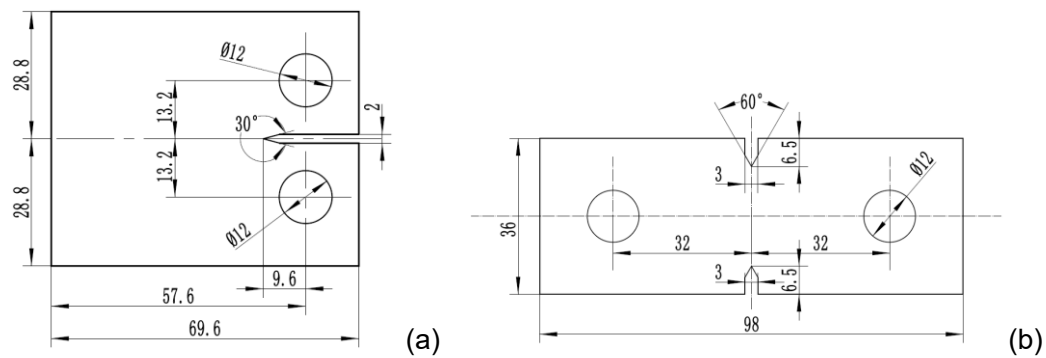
Geometry and dimensions (mm) of the specimens used in this study. (a) CT specimen and (b) DEN specimen.
